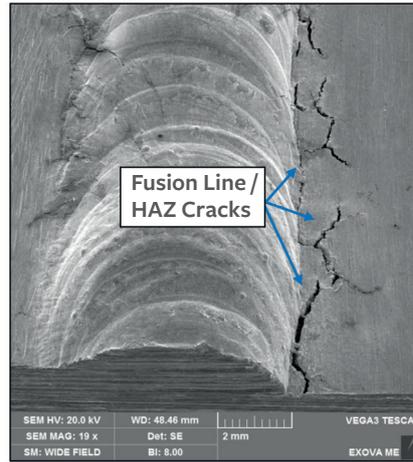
SEM analysis of weld root revealed cracking in the weld and the HAZ
